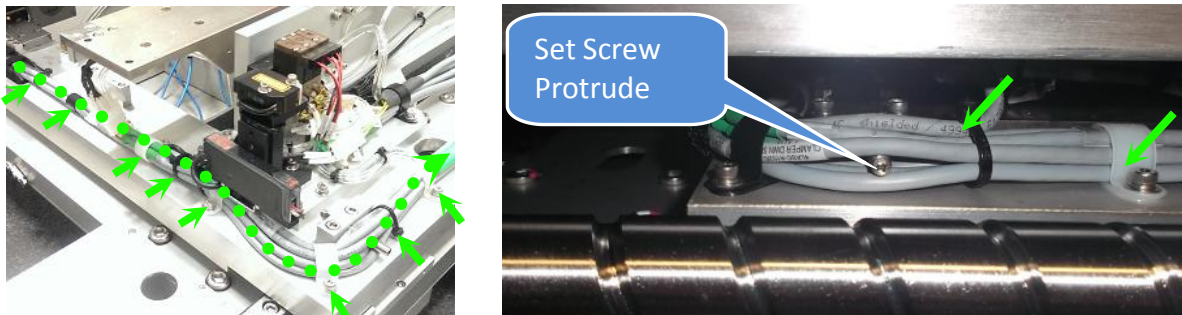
Stepper Motor Cable Routing (Fix Rail)
